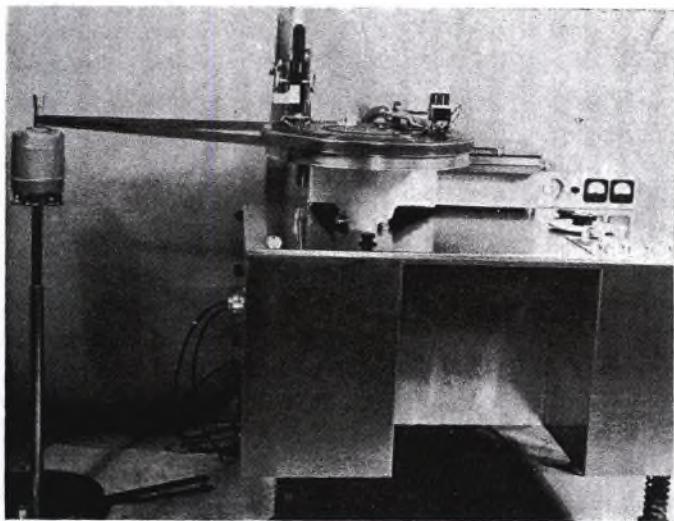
Overall front view of the lathe, showing the multiple belt drive for the turntable.
